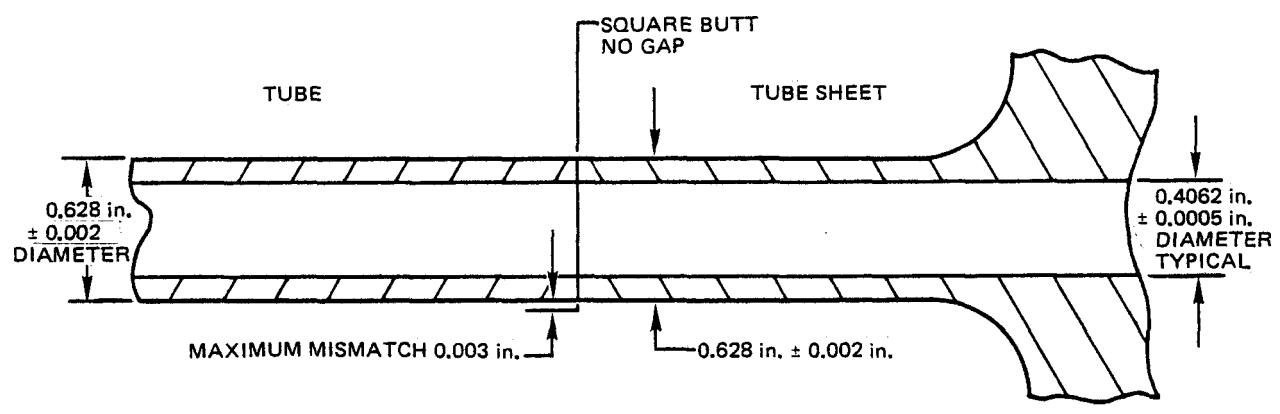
Tube-to-Tubesheet Joint Tolerances
